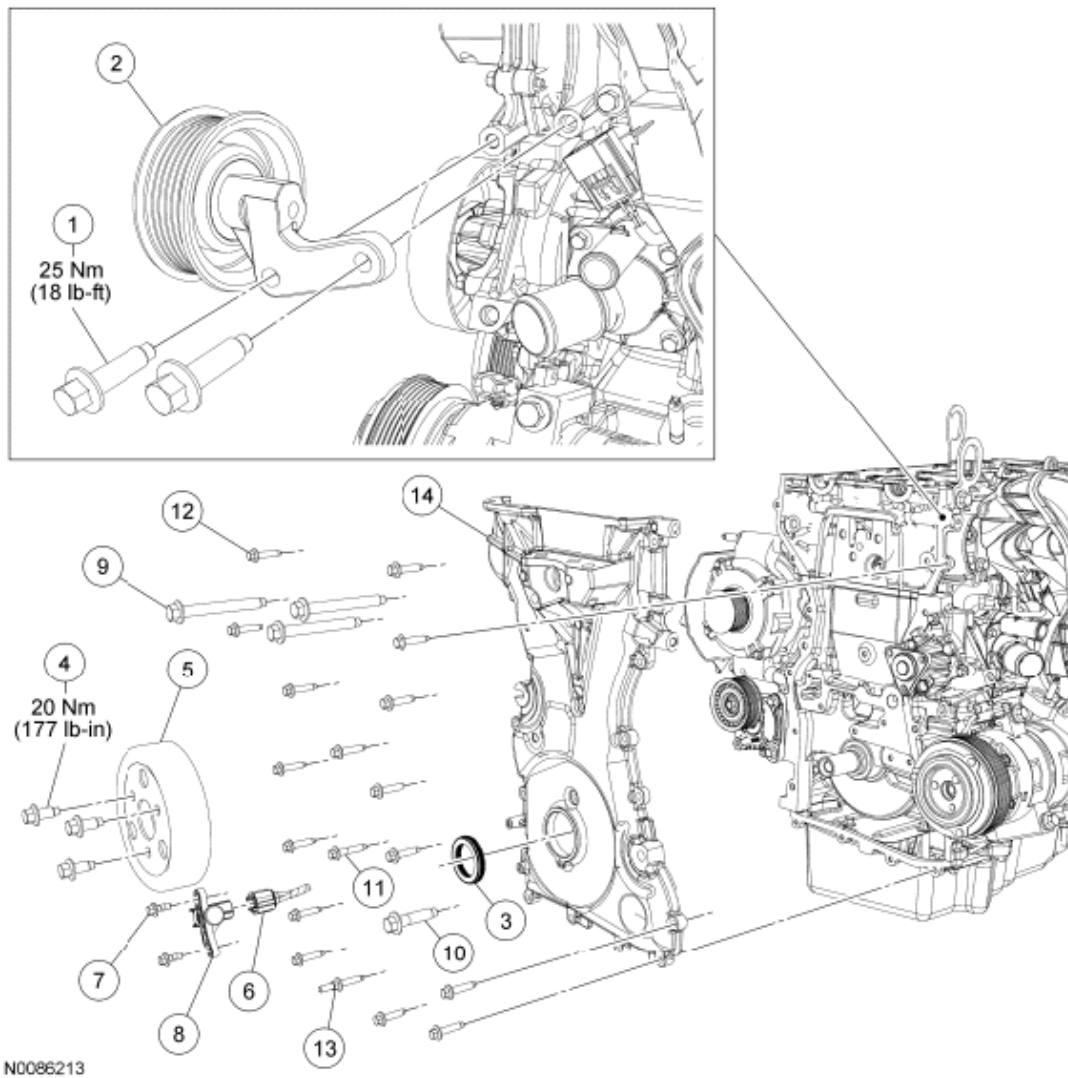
Exploded View Of Engine Front Cover Components With Torque Specifications
